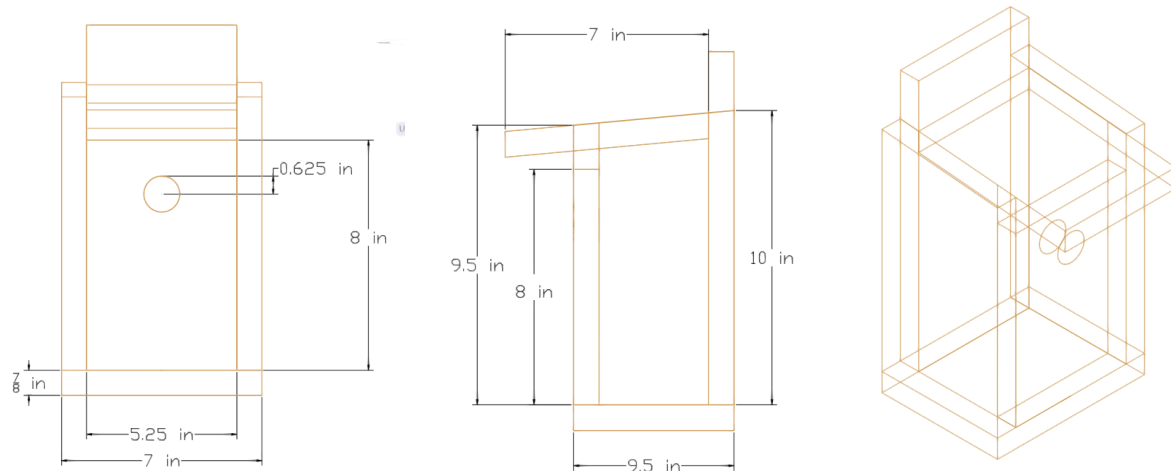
AutoCad drawing by Alex Garza depicting front, side and isometric views of the Nuthatch Homestead
